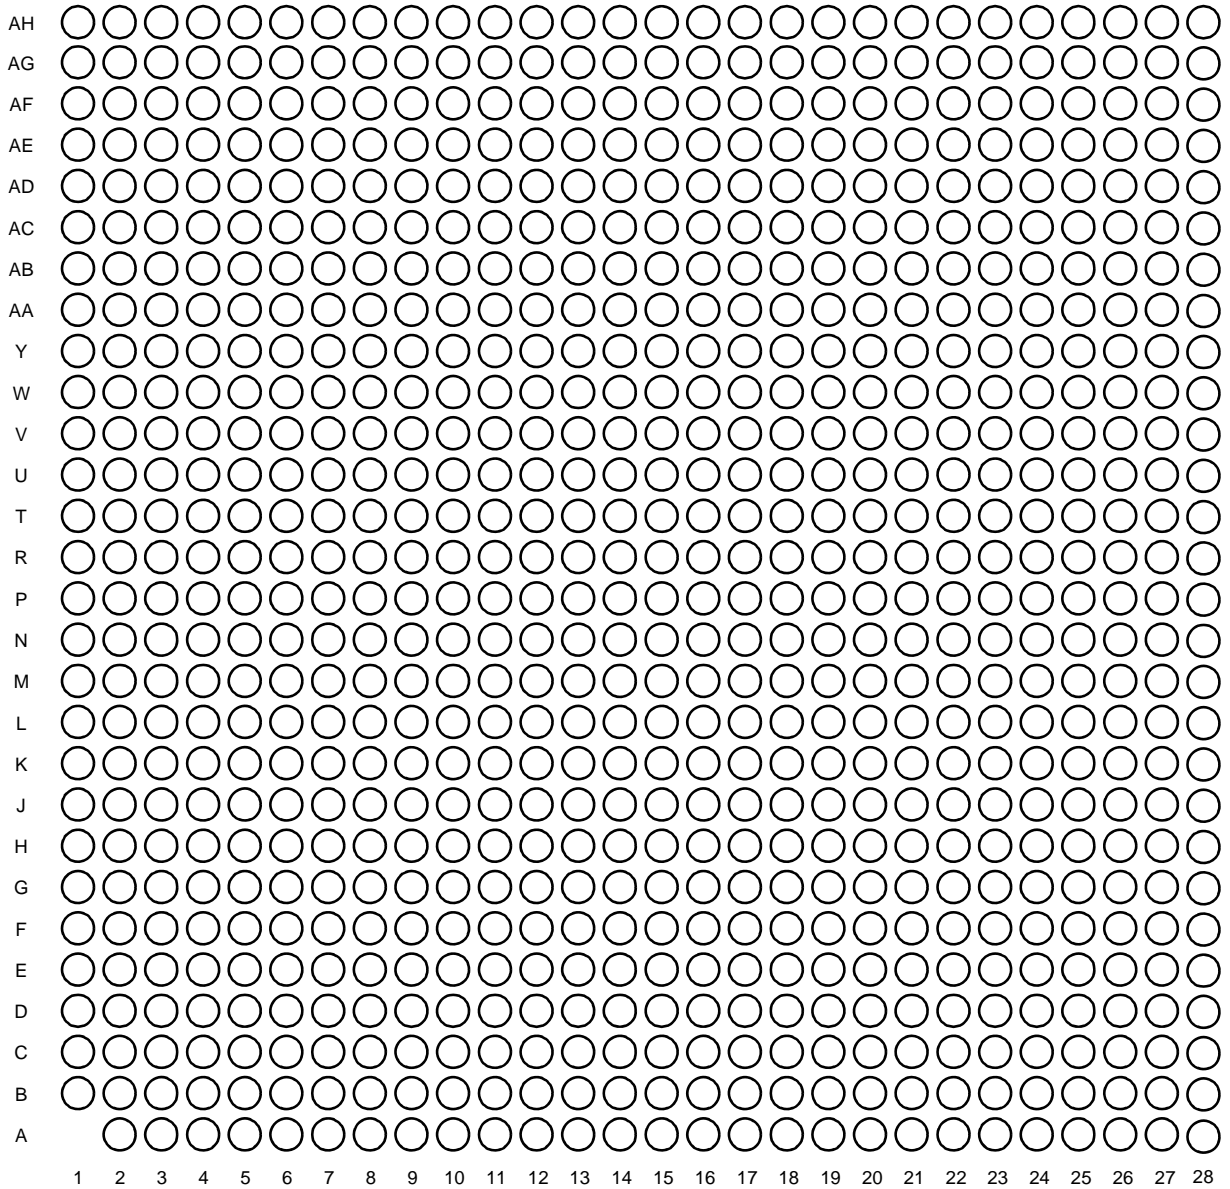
MSC8144 FC-PBGA Package, Bottom View
